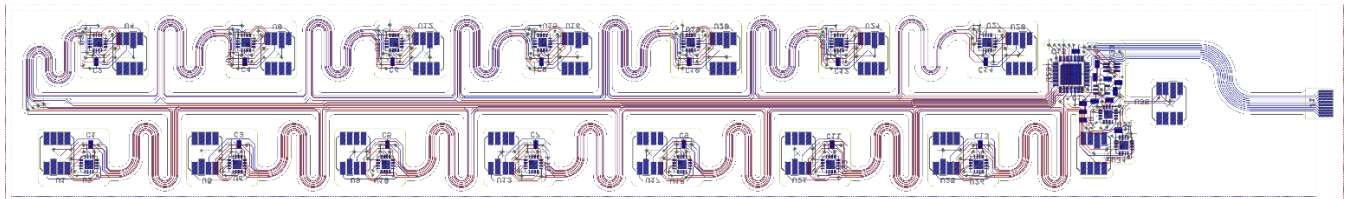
Completed board layout, overview. The top of the board is located on the right of the figure.
